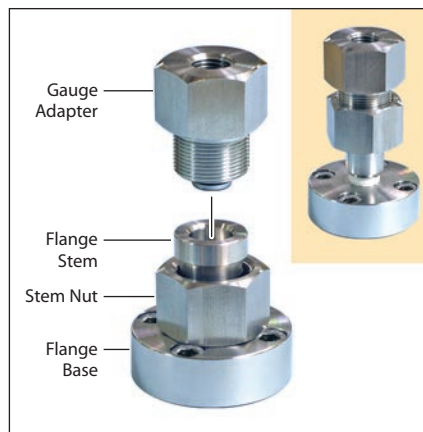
Two stainless steel gauge adapters are supplied with the GaugeCalXP Pressure Comparator.
